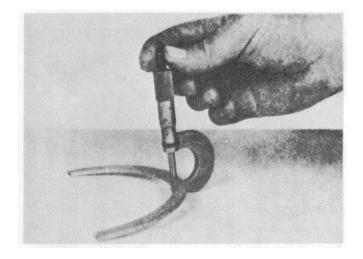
C-20. Check the Thrust Ring for Wear NOTE
